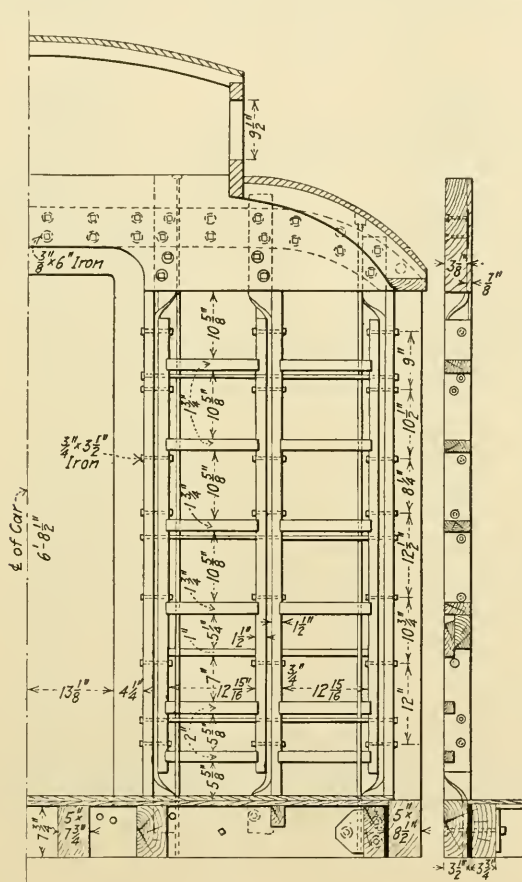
ANTI-TELESCOPING IRON END FRAMING
